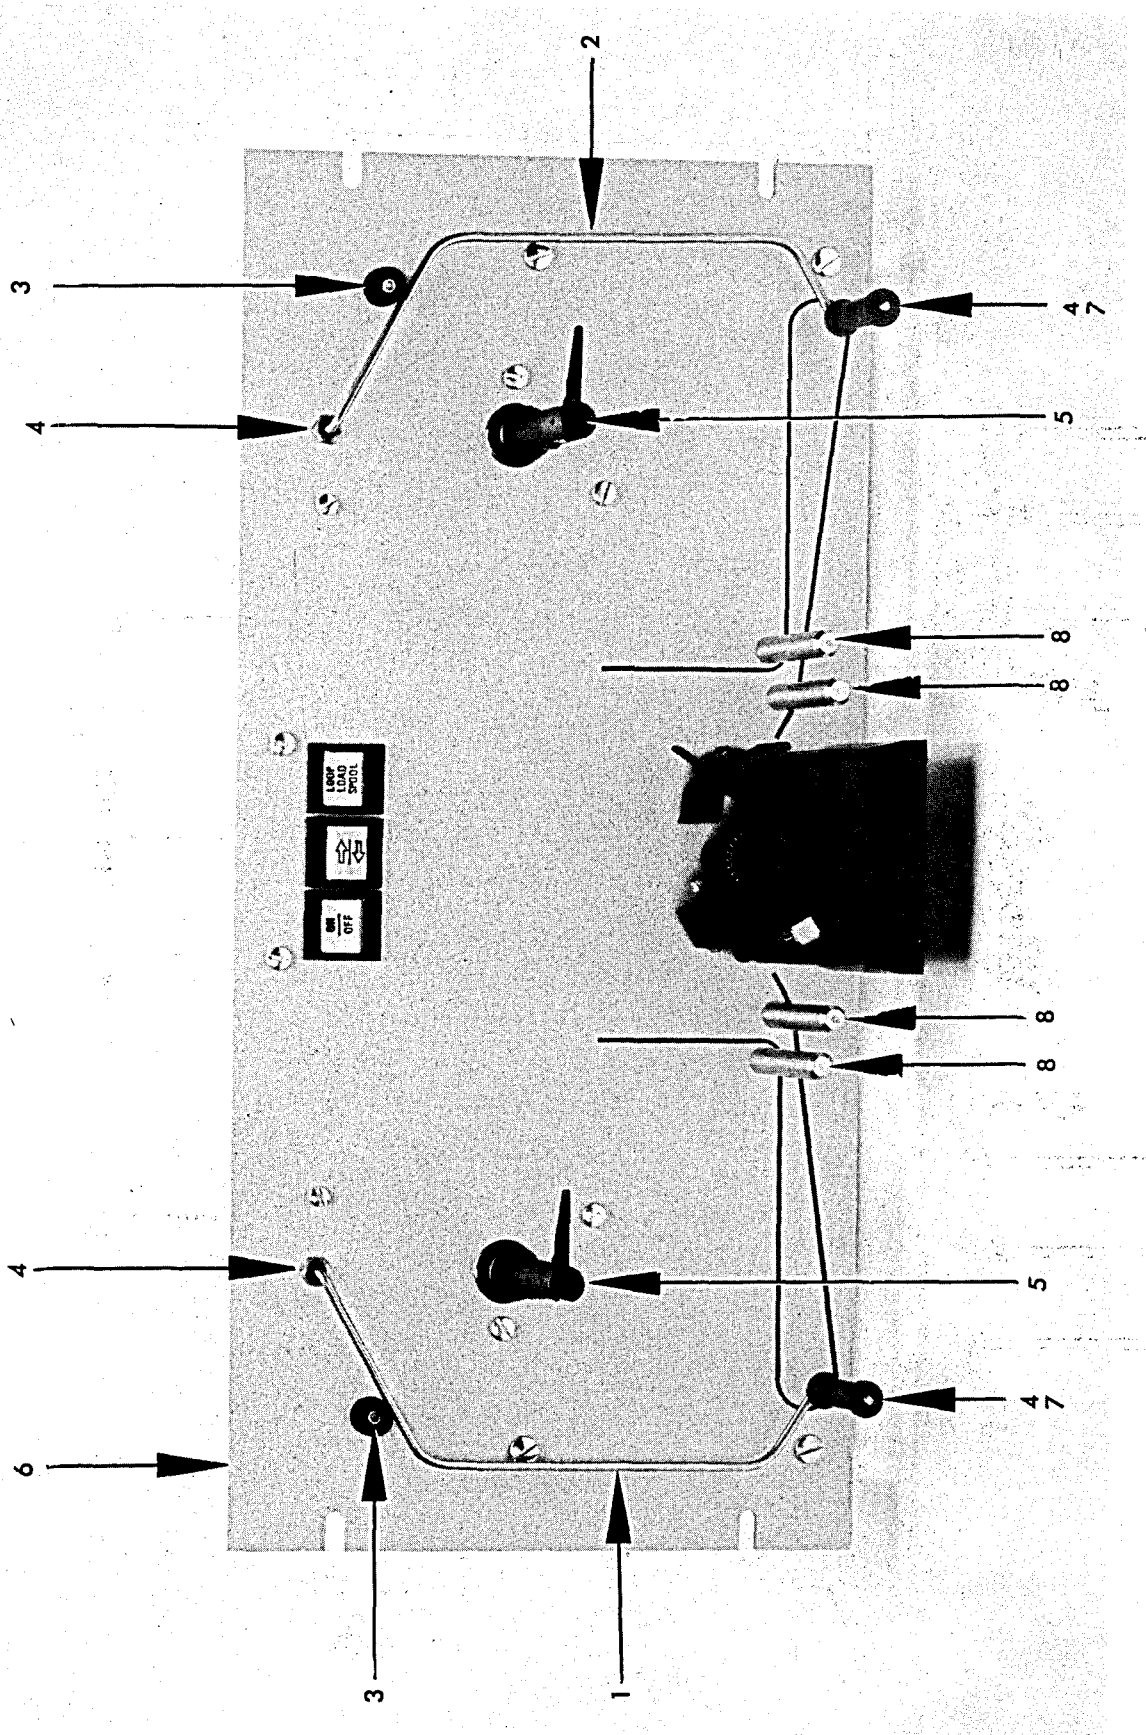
Front Panel, RRS7155BA1/660/D-A, Front View.
